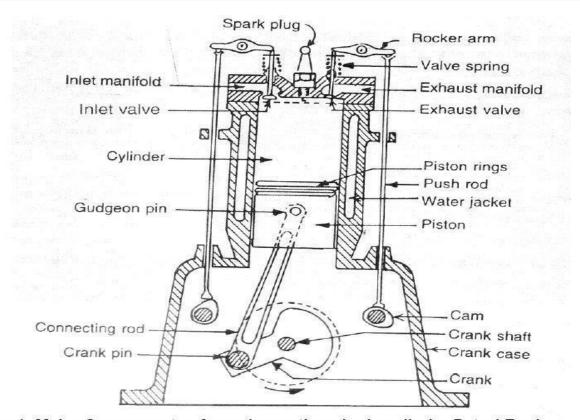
Major Components of a reciprocating single cylinder Petrol Engine.
